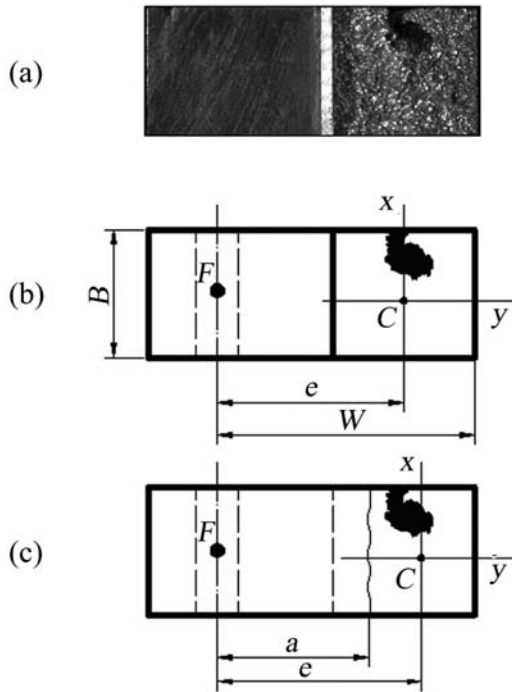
Defective specimen: (a) fracture, (b) defective fracture scheme, (c) defective fracture scheme with crack (F – tension force apply point, C – net area centre, e – load eccentricity, a – crack depth).
